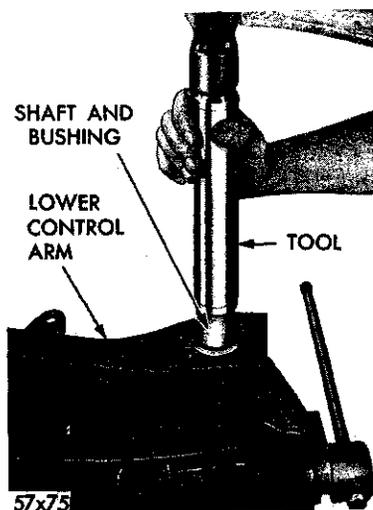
Installing the Lower Control Arm Shaft Assembly
